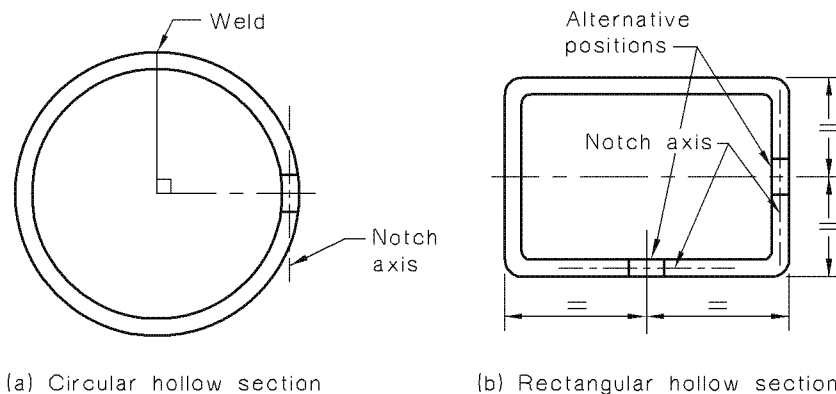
CROSS-SECTION POSITION OF TEST SPECIMEN FOR TENSILE AND IMPACT TESTS
